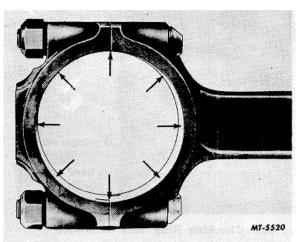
Connecting Rod Bearing Bore Out-Of-Round Measurement
